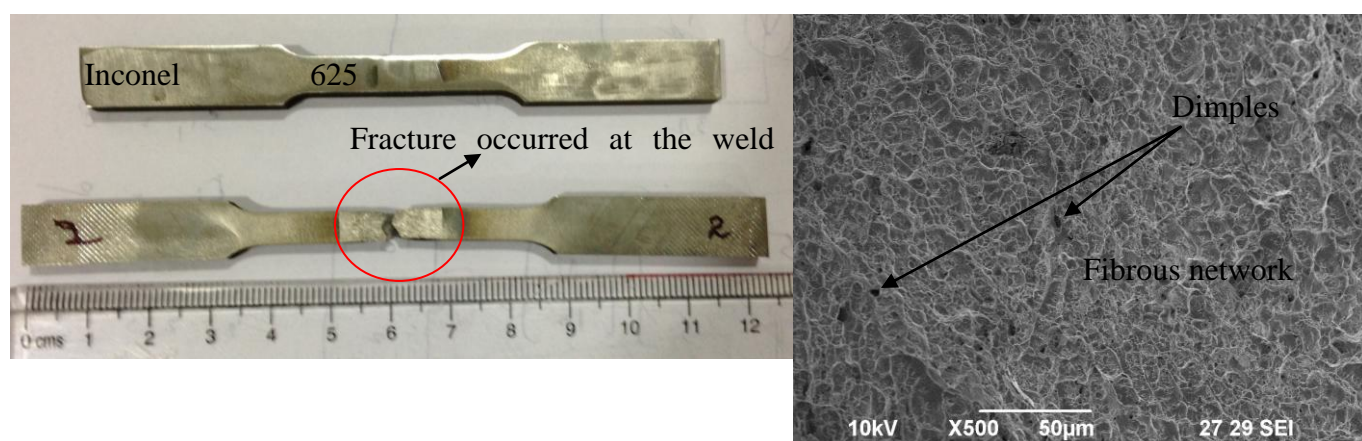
(a) Fractured tensile sample (b) SEM fractograph showing the dimples and micro-voids
